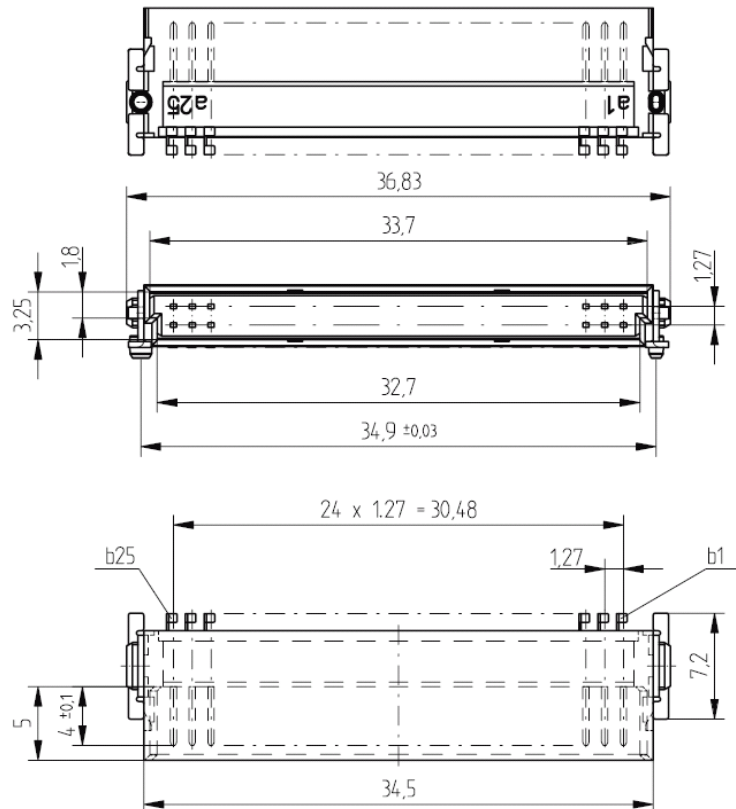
coolteq.h™ Modulator Envelope, Control & Monitor Interface, Connector Mechanical Drawings.
